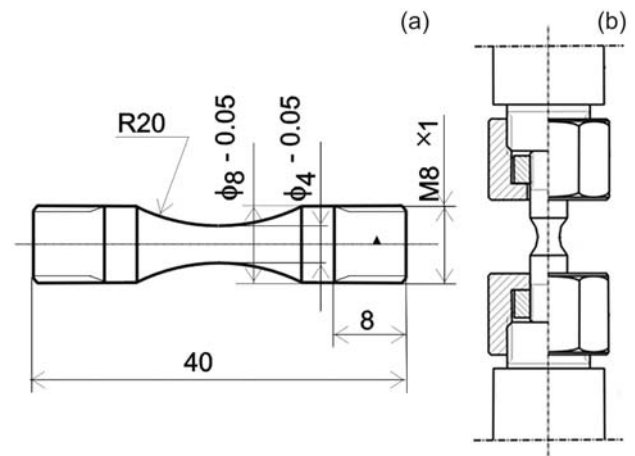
Specimen (a) and gripping system (b) used for fatigue tests.
